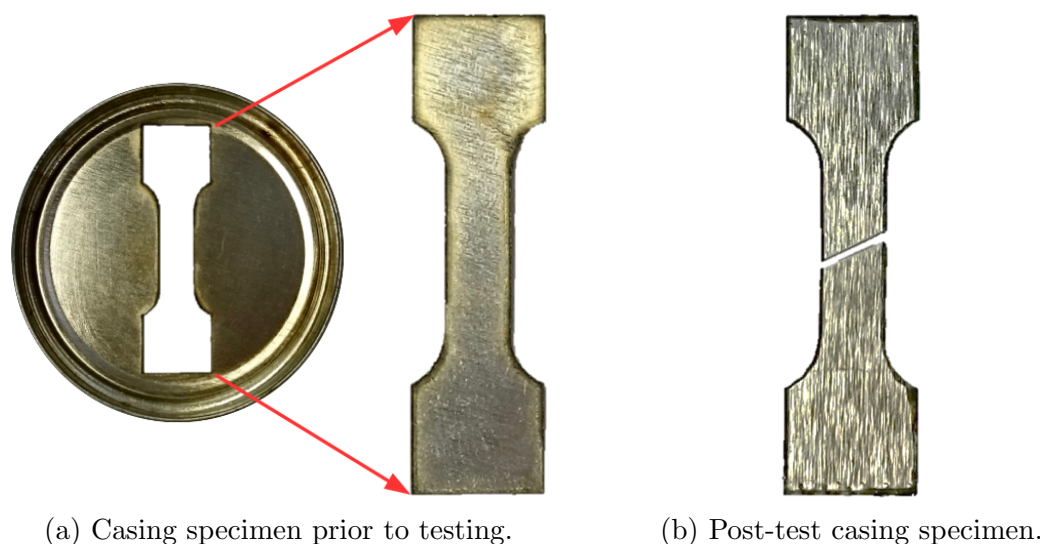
Modified tensile test specimen laser cut from two different casing caps, prior to and following a tensile test.
